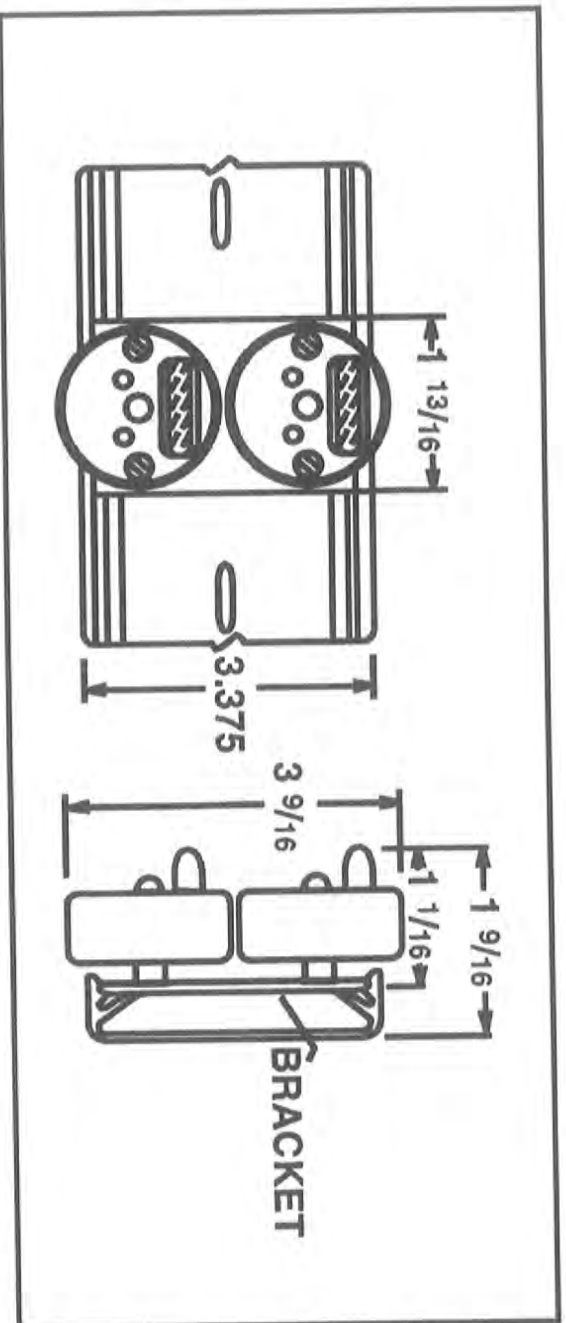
Installation with the Bracket and Track (Dimensions in inches)
